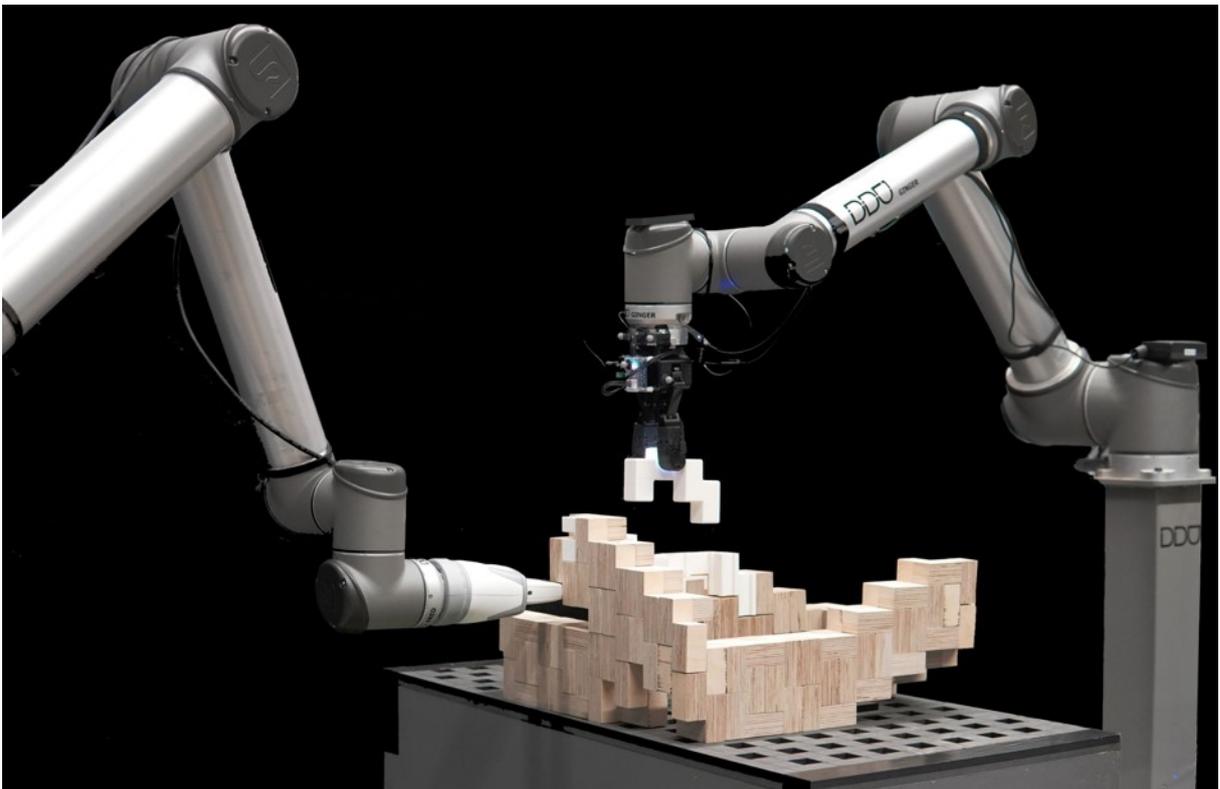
Robotic collaboration for the assembly of the demonstrator
